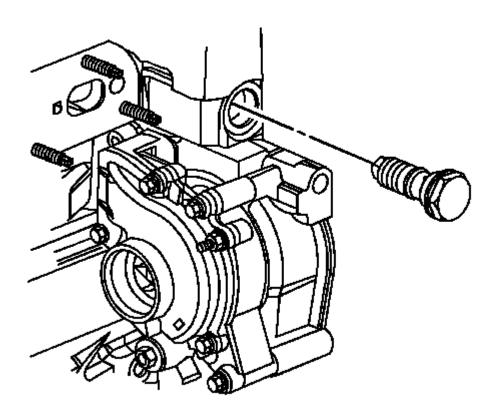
Open Ended Wrench & Actuator Bolt Courtesy of GENERAL MOTORS COMPANY
